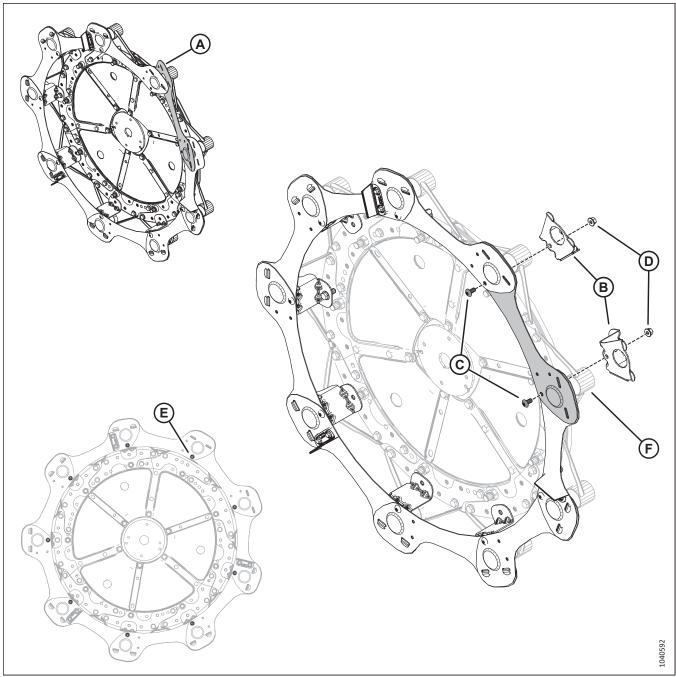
Nine-Bat Reel – Initial Endshield Assembly
